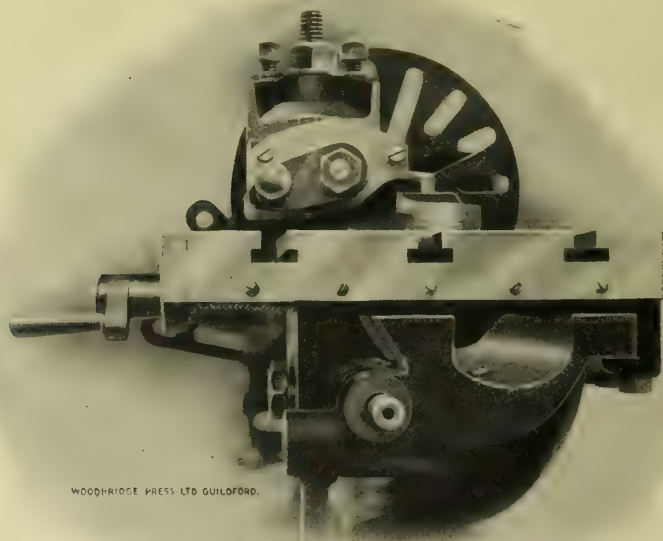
END VIEW OF BED OF 3½IN. LATHE. MESSRS. DRUMMOND BROS., LTD.
